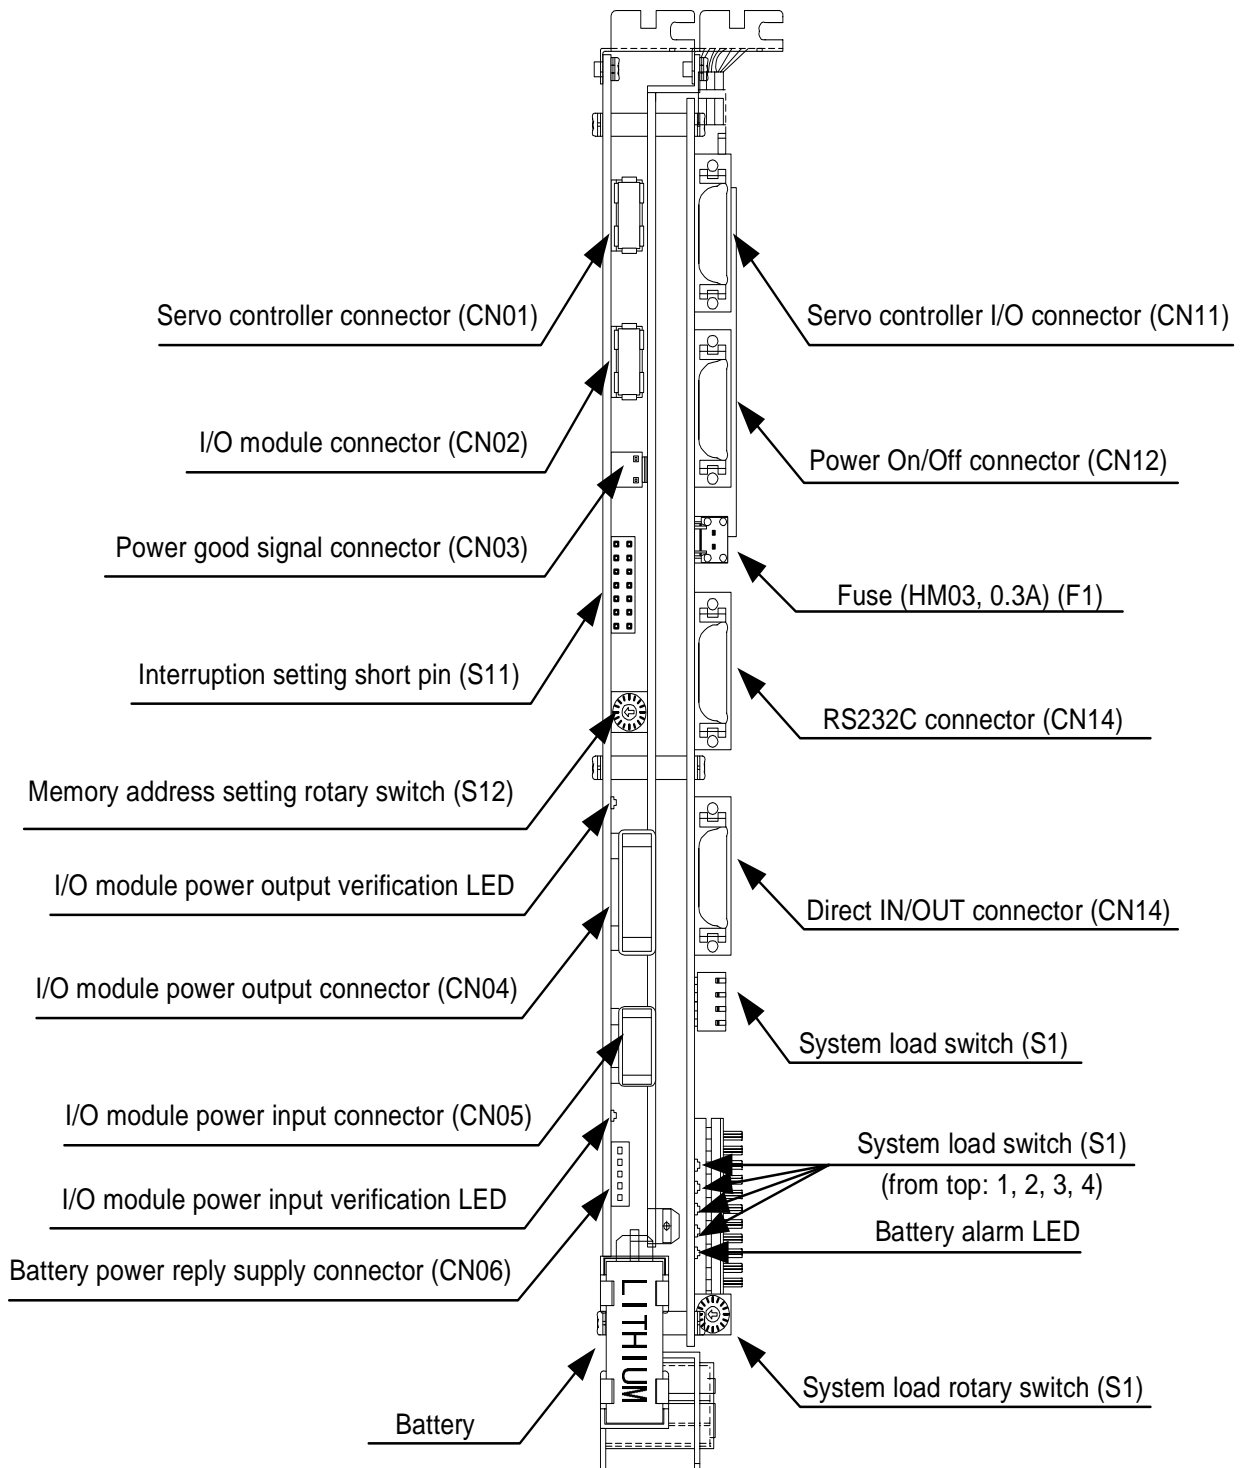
Details Layout of YASNAC JZNC-JFC10 Board
